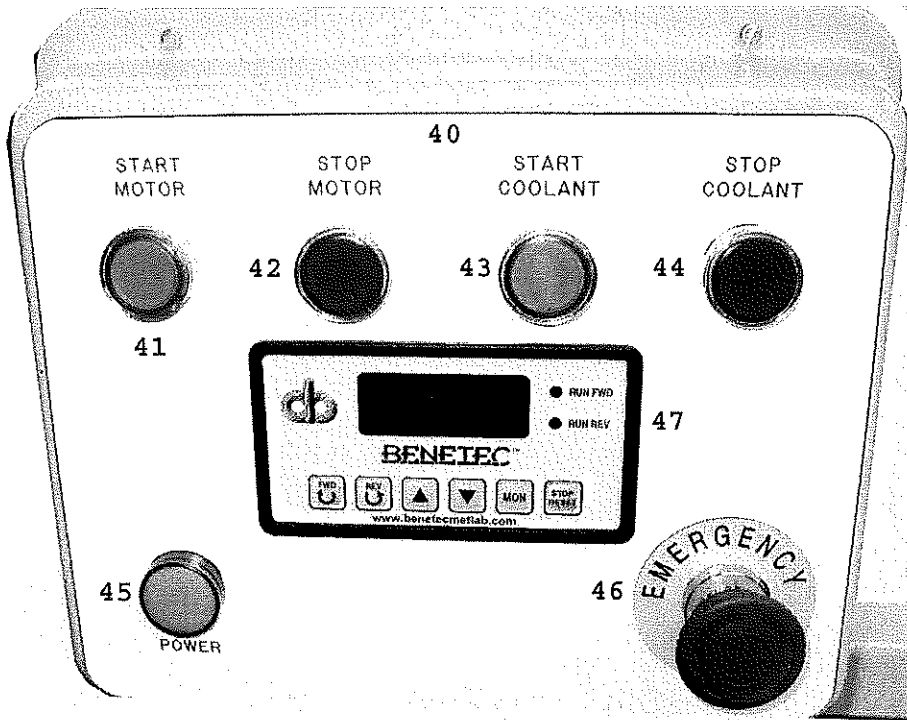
A Control pod for 5600 Slider Cutter -#47 inverter display module
